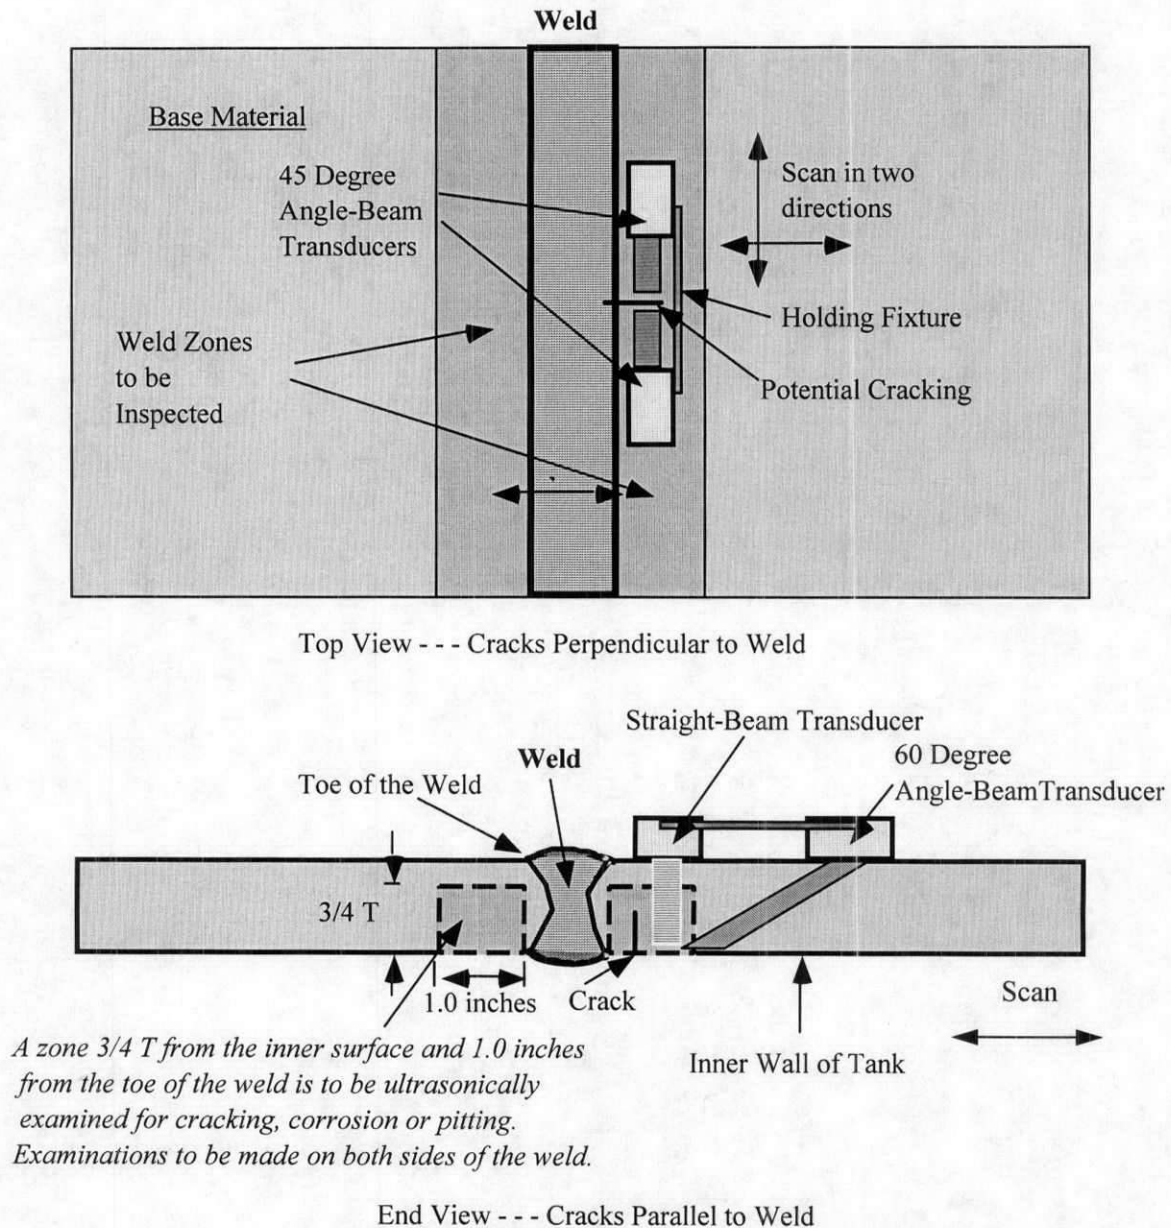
Views of the Weld Zone to be Ultrasonically Examined in the Primary Tank Wall
